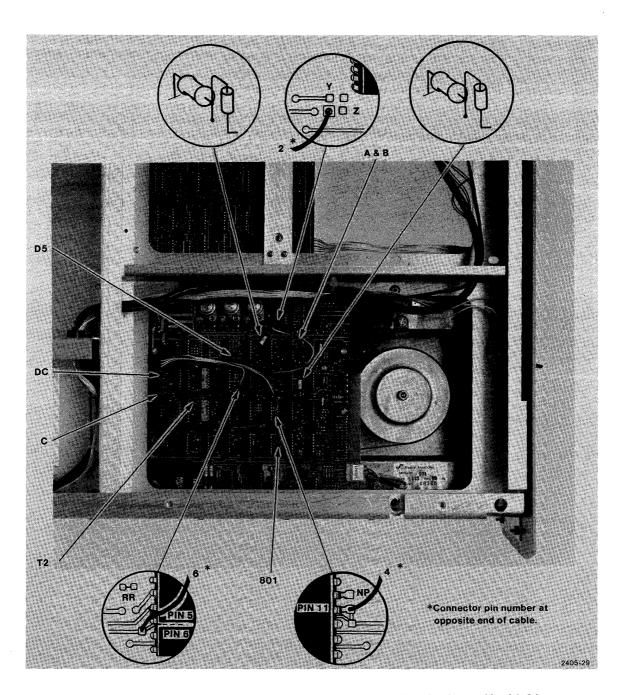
Disc Drive Board Straps and Wiring Modifications.
